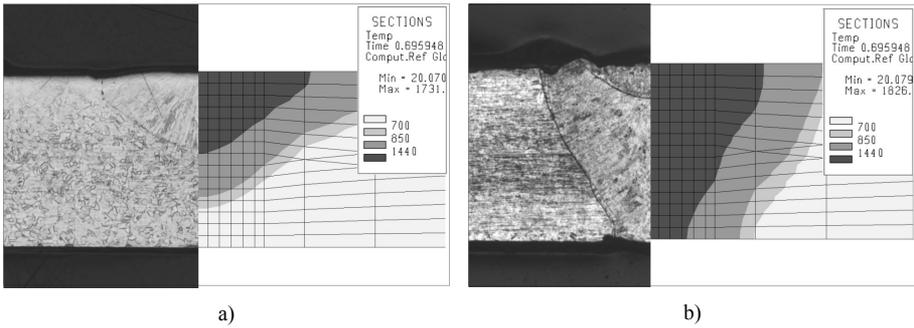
Modelled and real weld cross section shape, a) sample no. 1, b) sample no. 2.
